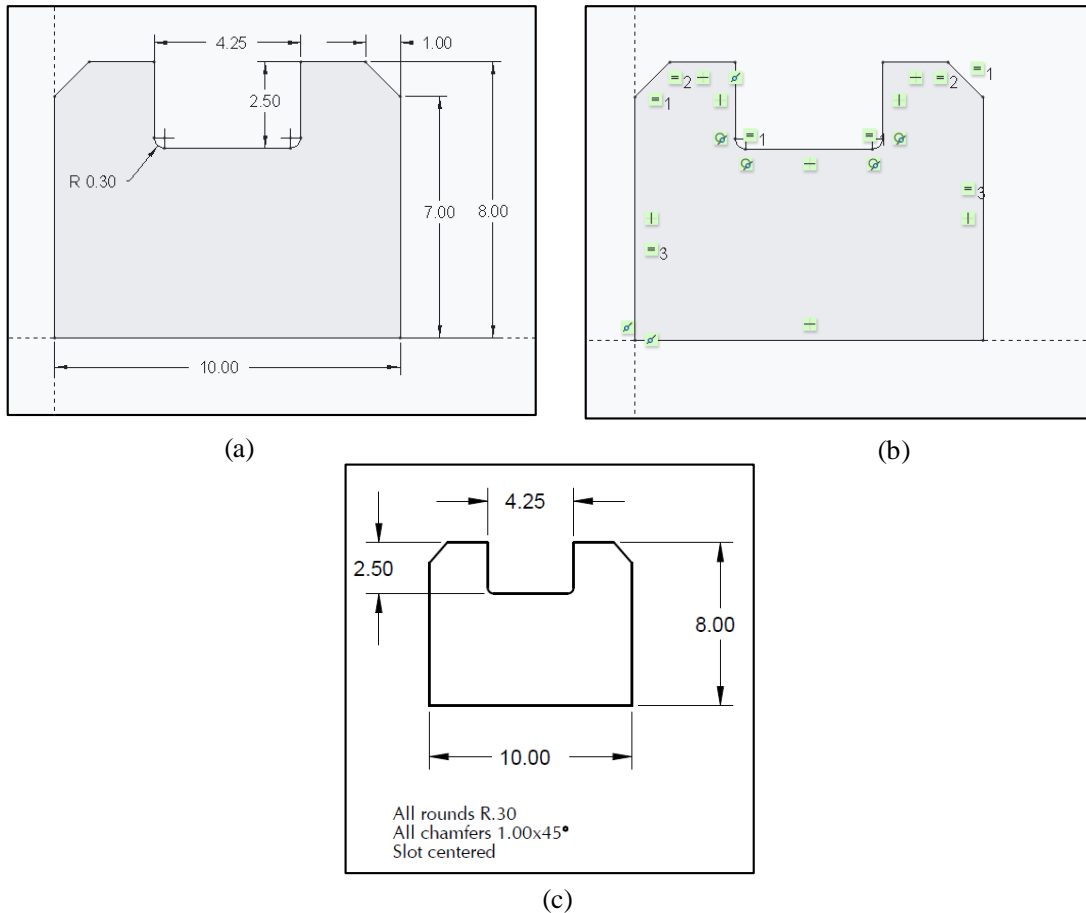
Illustration of (a) sketch dimensions, (b) sketch constraints, and (c) engineering drawing dimensions and notes. Sketch and drawing created in CREO Parametric™ version 6.
